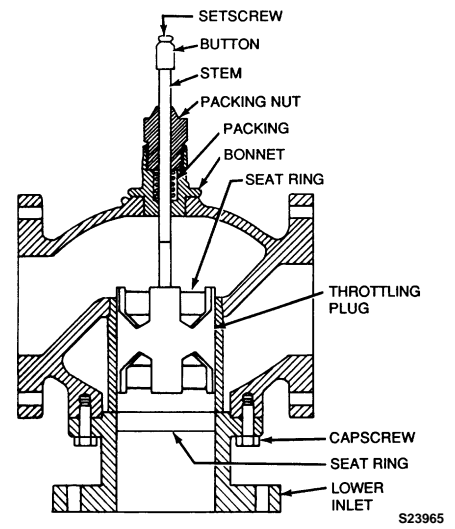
Three-Way V5013A Flanged Body Valve—Cutaway.
